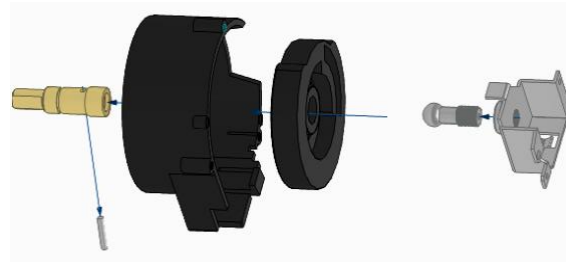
Redesigned Gate and Control Valve and its mounting Top Closure sub-assembly
